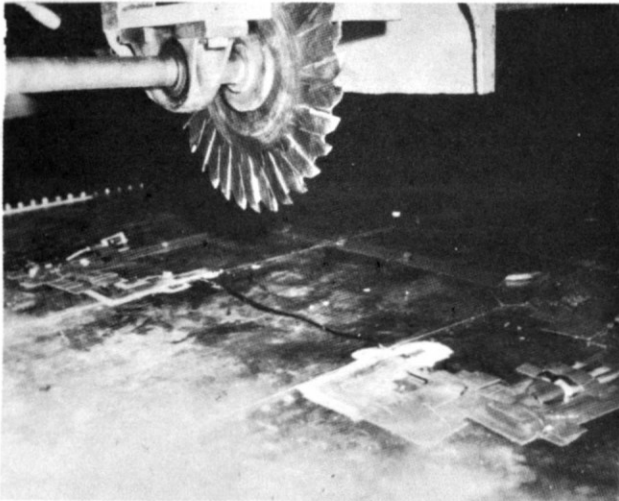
Rotary Saw Used in Damage Tolerance Tests
